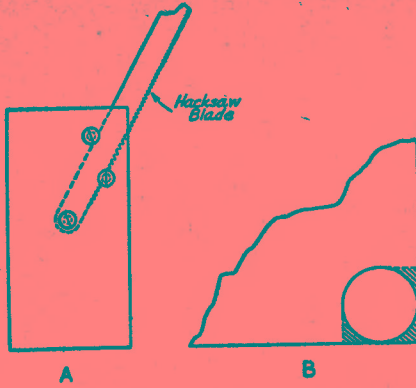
To cut rectangular holes in a chassis corner, holes may be filed out as shown in the shaded portion of B, making it possible to start the hack-saw blade along the cutting line. A shows how a single-ended handle may be constructed for a hack-saw blade.
